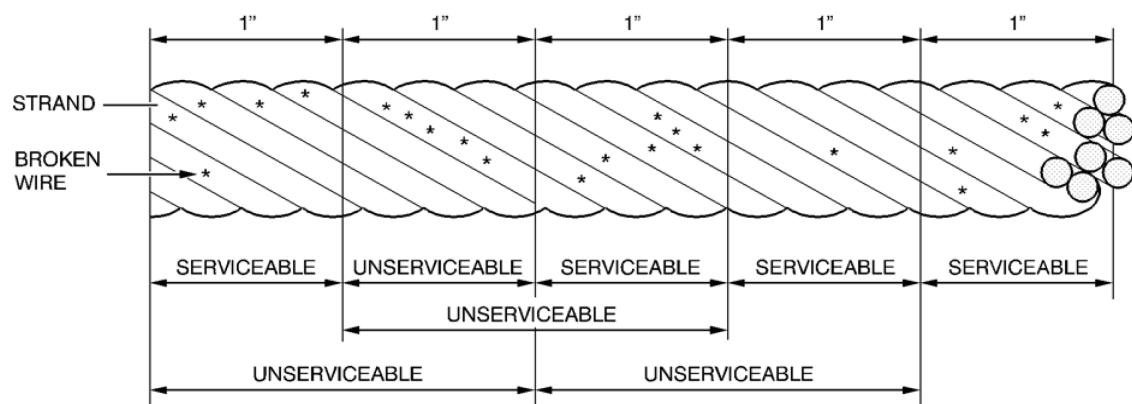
Installation of the static line anchor cables (Sheet 2 of 2)
